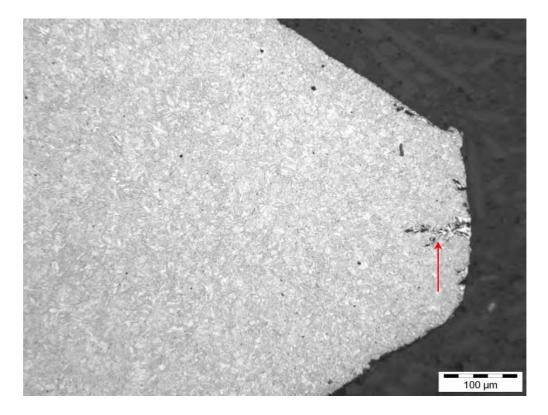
Micrograph (original image captured at X200), specimen etched in Nital. Detail of thread rolling intrusion (arrowed) in fatigue fractured bolt, which confirmed that the bolt had been thread rolled rather than screw cut and heat treated after threading.
